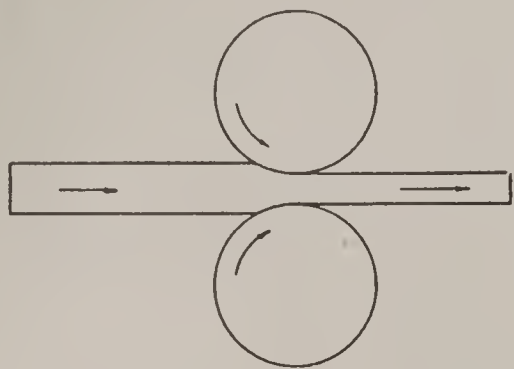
MANNER IN WHICH PIECE IS REDUCED.
